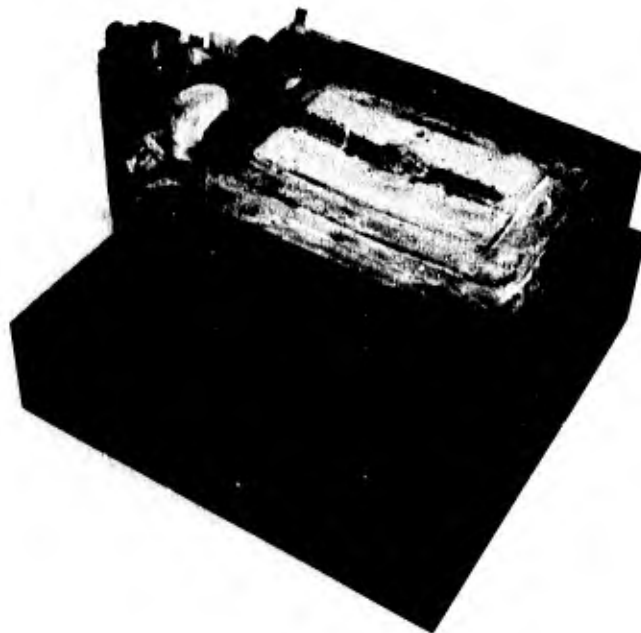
Simplified mold assembled on a 6-inch-thick copper block with a 240-pound steel slab casting.
